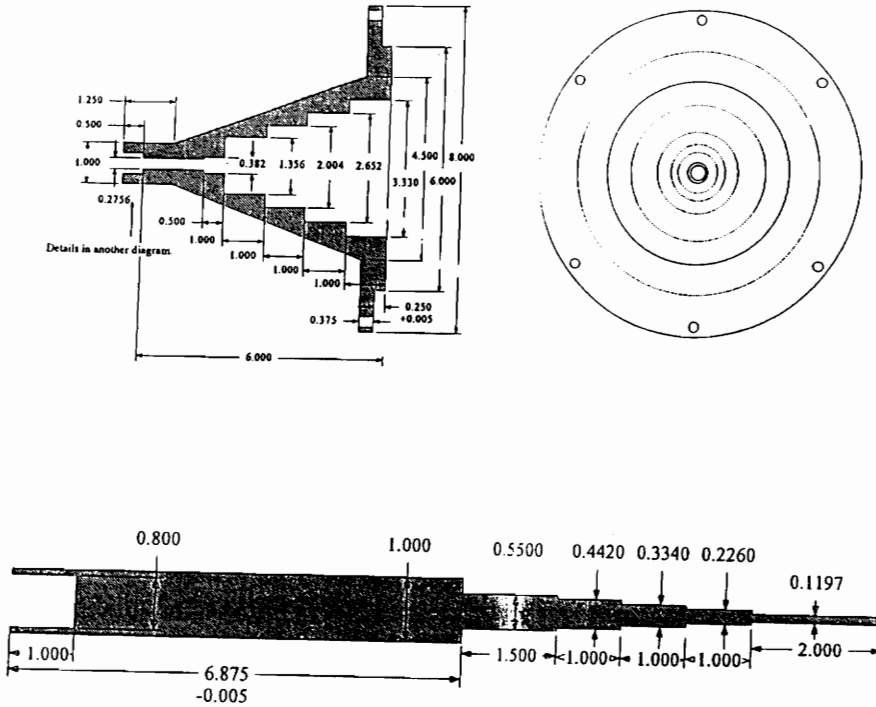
Sectional view of the tapered section with center conductor. (Dimensions in inch)
